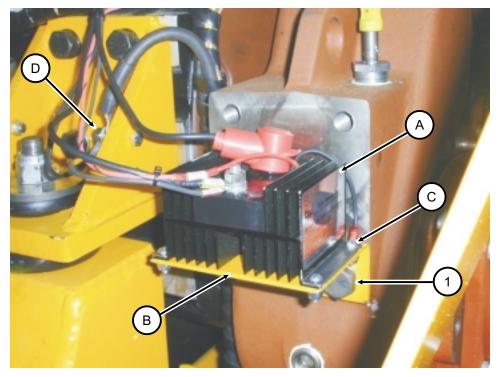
NEW MOUNTING OF SOLENOID AND BRACKET
